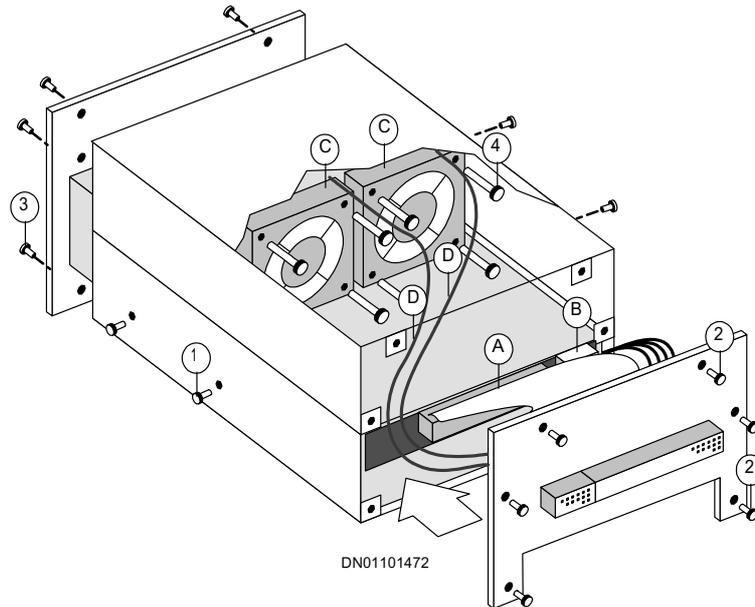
Installing the FDU drive (Magneto Optical Disk Drive and ODAD-A)
